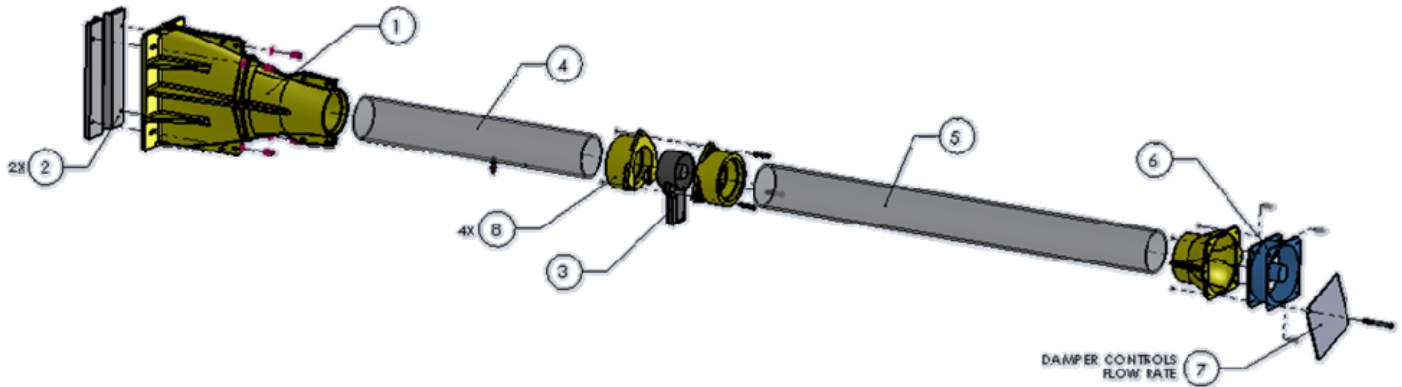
Blower and Duct Assembly (Drawing T300)
